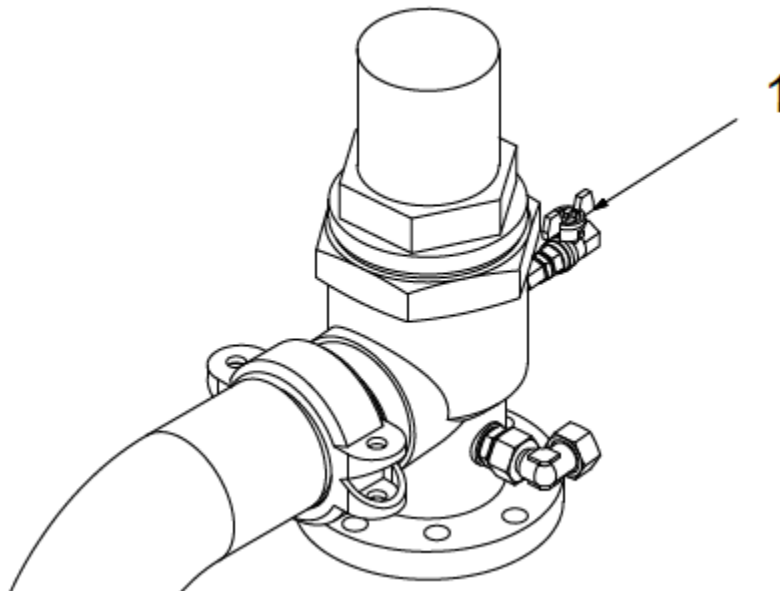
Bleeder valve position for air-cooled compressor systems
